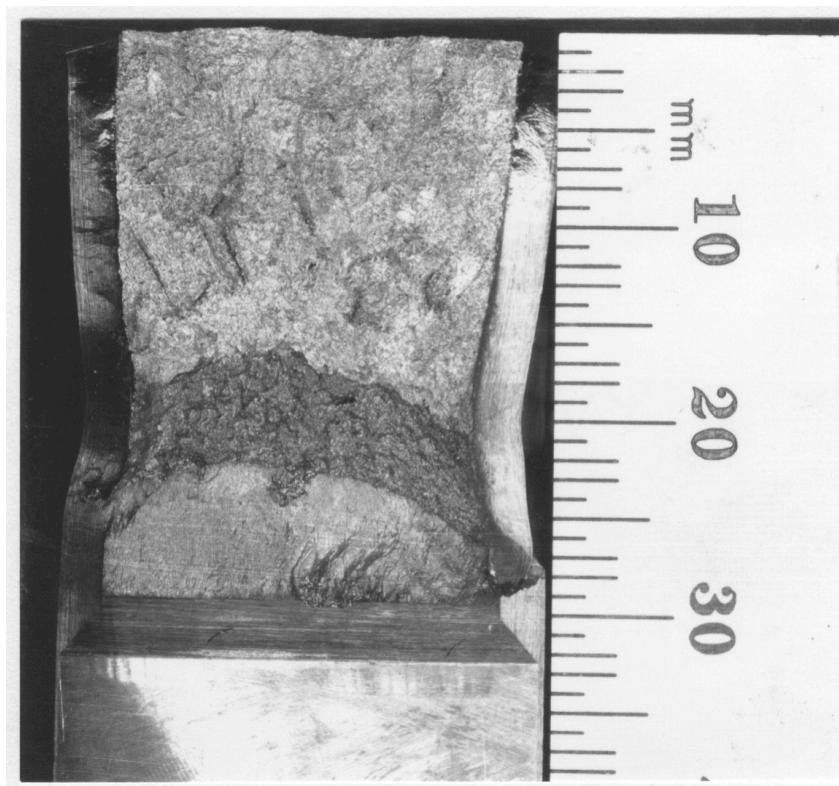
Fracture surface of pump volute PV tested at 290°C after 13 y of service at 264°C
